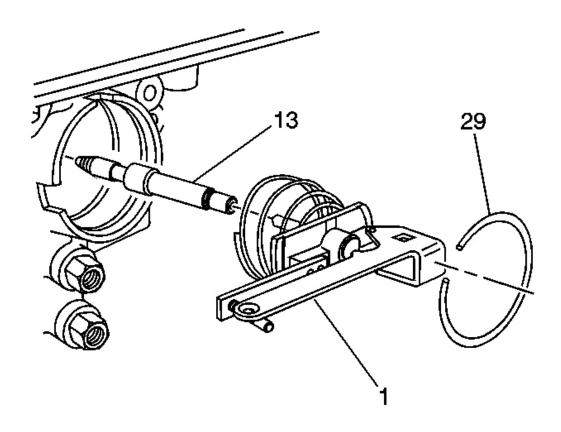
2-4 Servo Assembly Courtesy of GENERAL MOTORS CORP.
